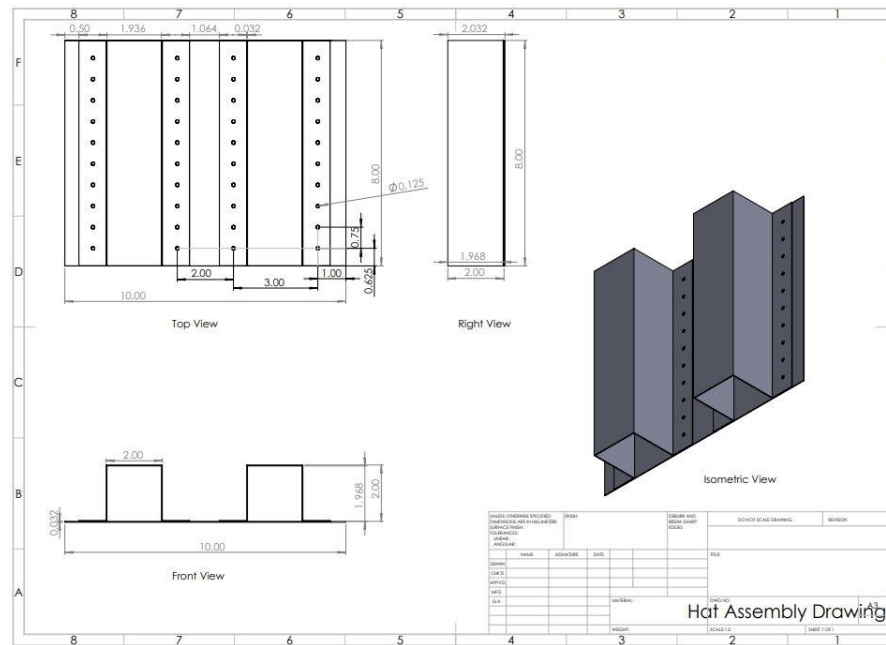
SolidWorks Drawing for Hat Panel Assembly
